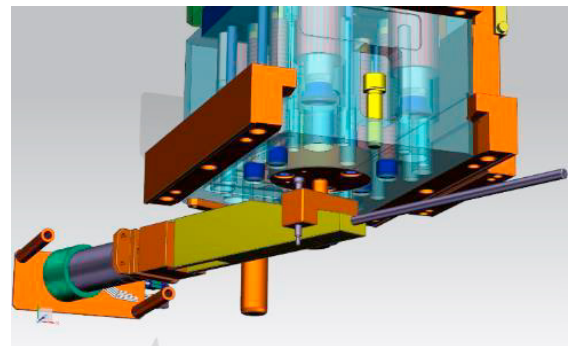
Motor driving the lever system to set the pretension of the ejector and blank holder
